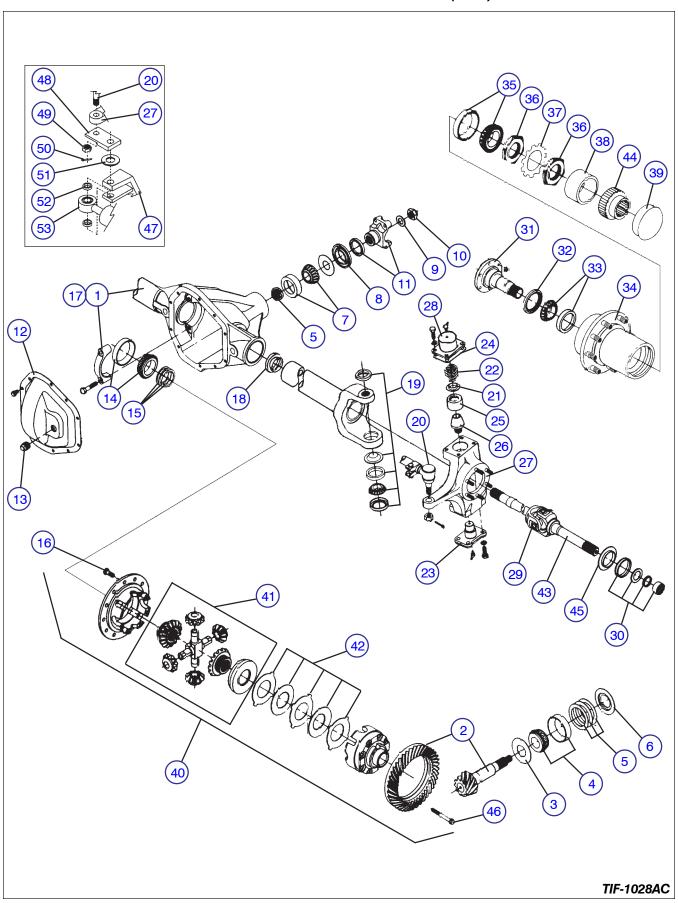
FRONT AXLE ASSEMBLY (4WD)
